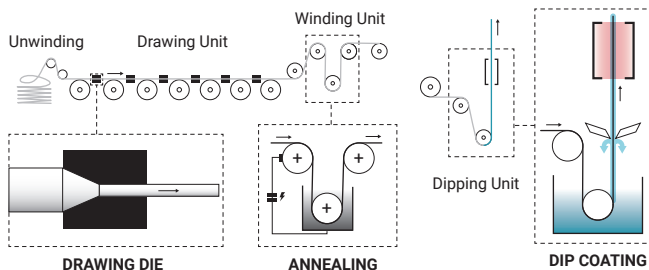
Schematic overview of the wire drawing and dipping process. The wire initially passes through several drawing steps to become thinner and longer. Next, the wire is annealed and quenched. Finally, the metallic thread is coated using the Dip Coating method.
